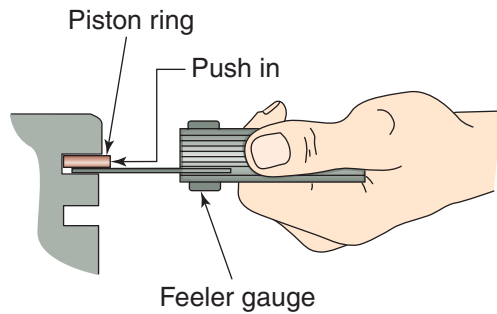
Checking piston ring groove clearance with a feeler gauge.
